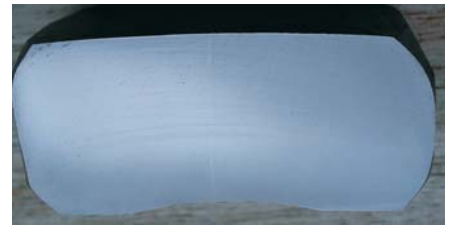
Welding seam of a longitudinal-seam welded tube with subsequent double annealing (ground section etched to show the ferrite line)
